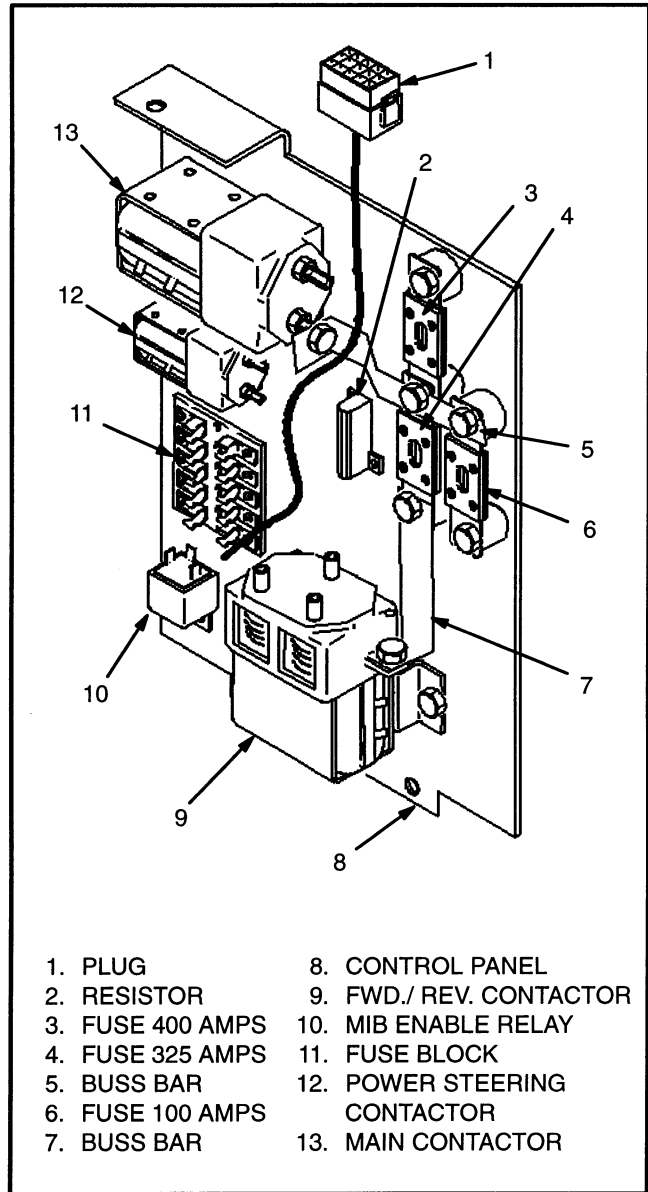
CONTACTOR PANEL ASSEMBLY
